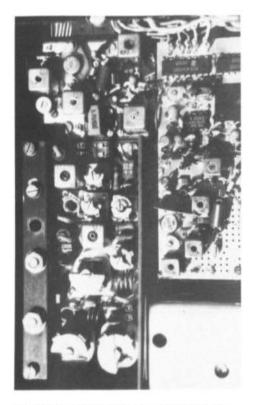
TELECAR driver and output stage showing also part of DL 5 NP 001 synthesizer printed circuit board
